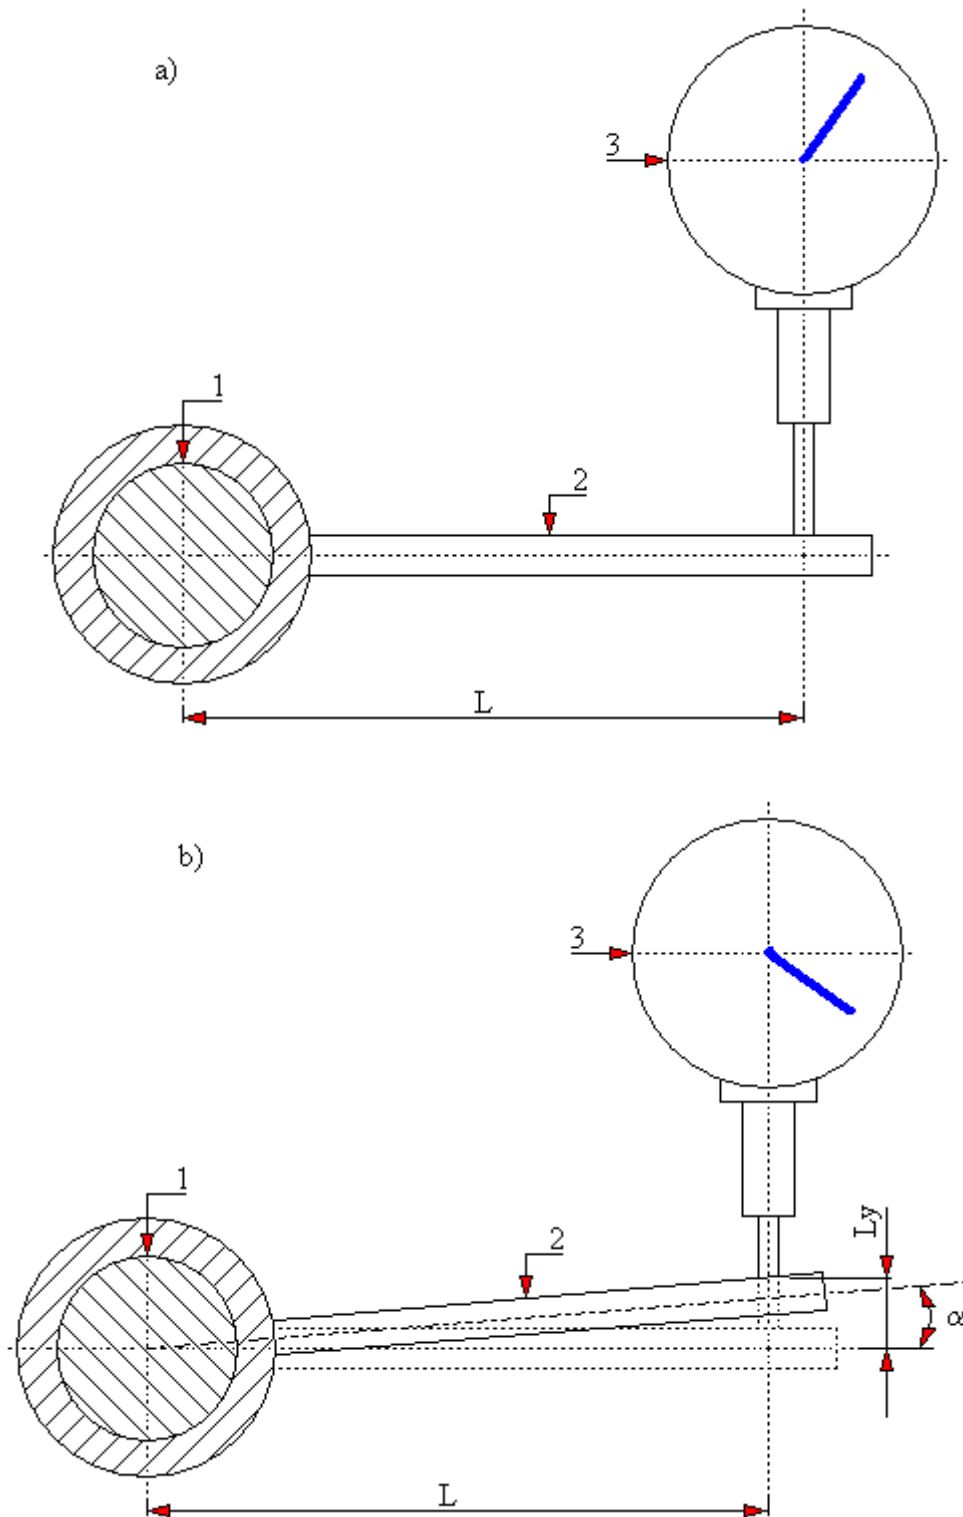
Changing the position of the measuring gauge lever before (Fig. a) and after (Fig. b) loading the shaft with a torque moment
